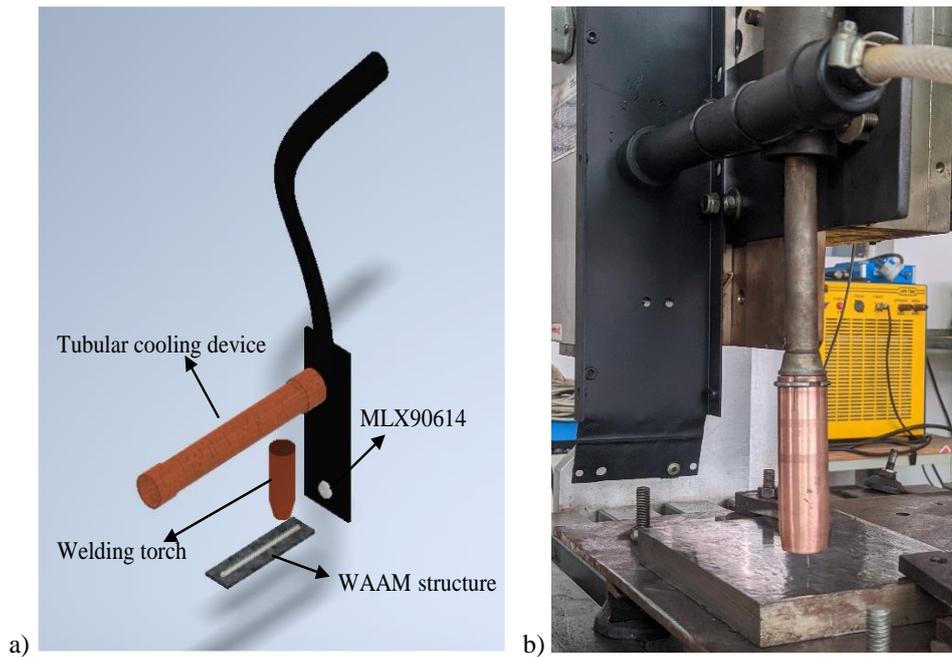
Setup for a) Forced air cooling system and b) Implemented system.
